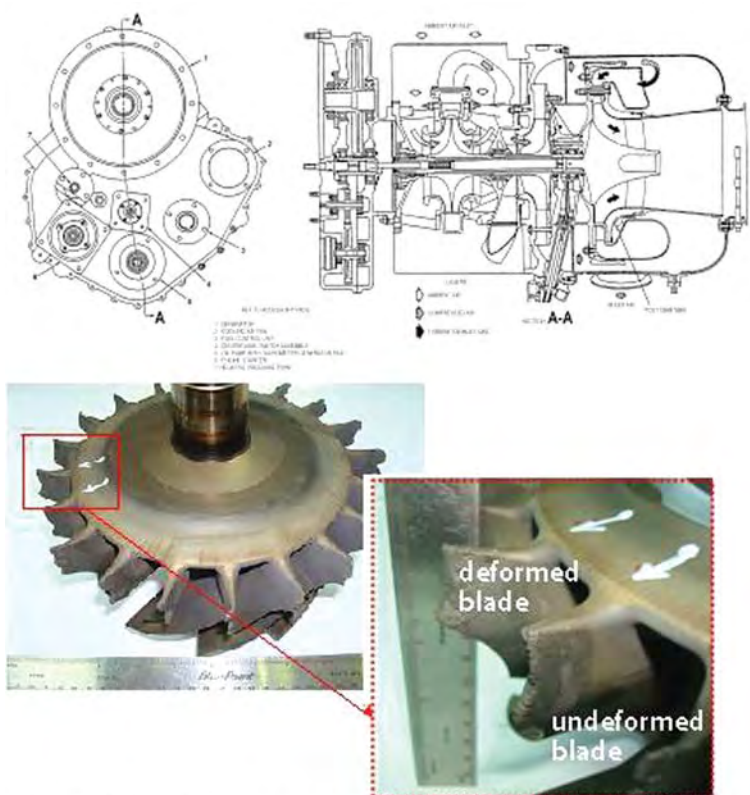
Failed and worn out turbine wheel blade tip due to cracking, two samples of deformed and undeformed blade were researched
